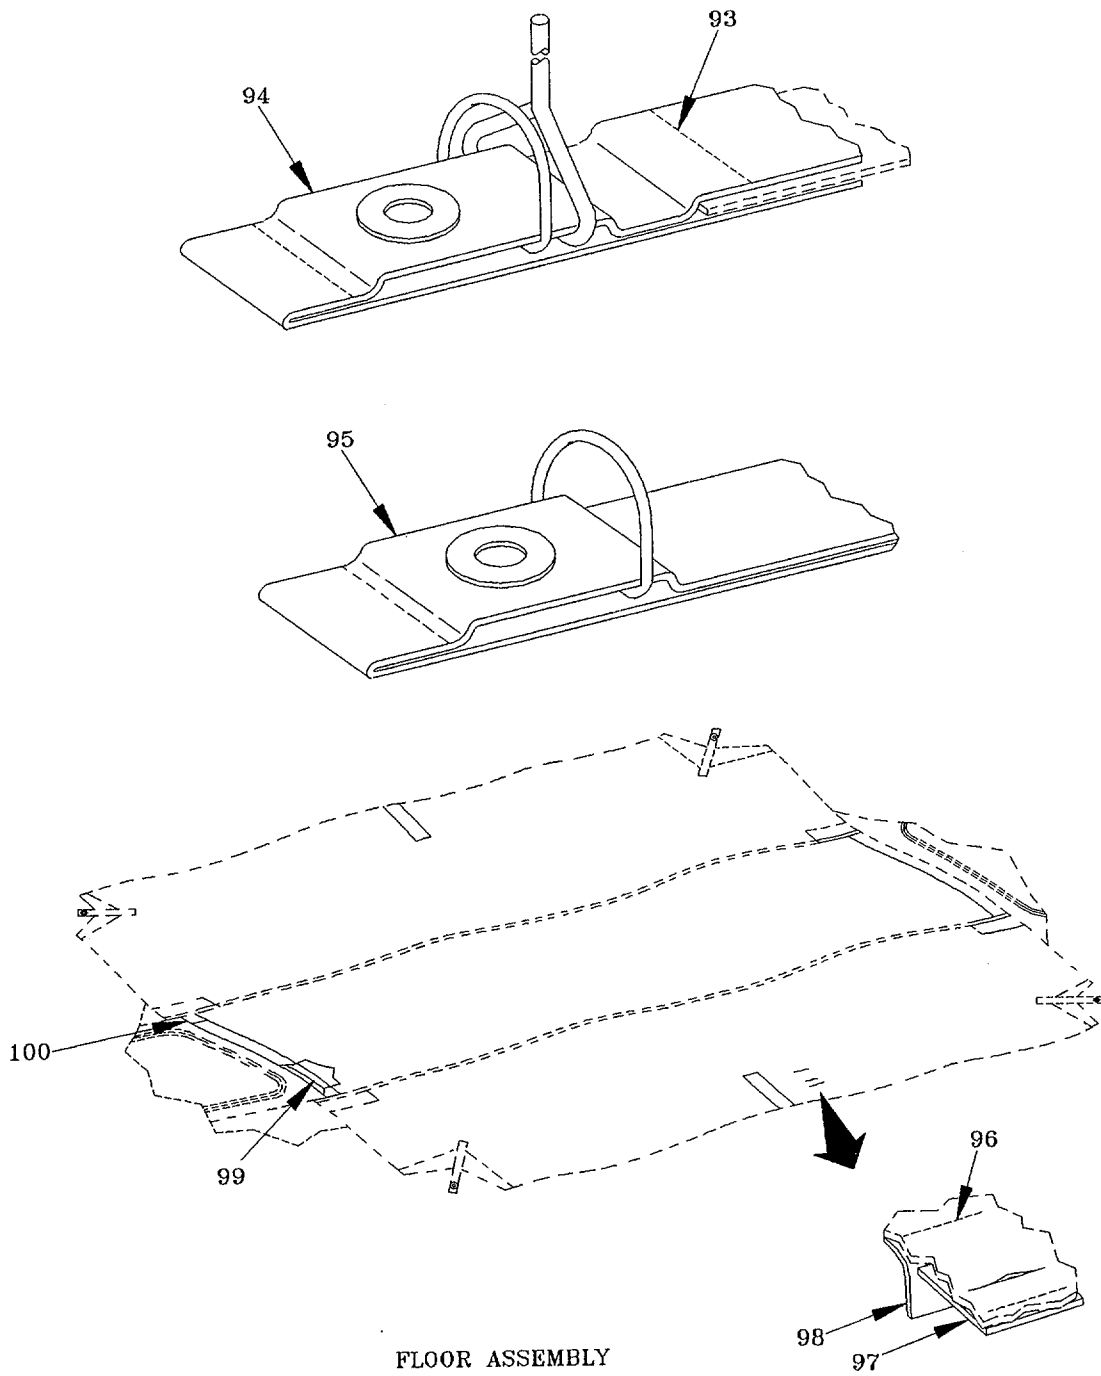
TENT BODY ASSEMBLY (Sheet 8 of 10)
